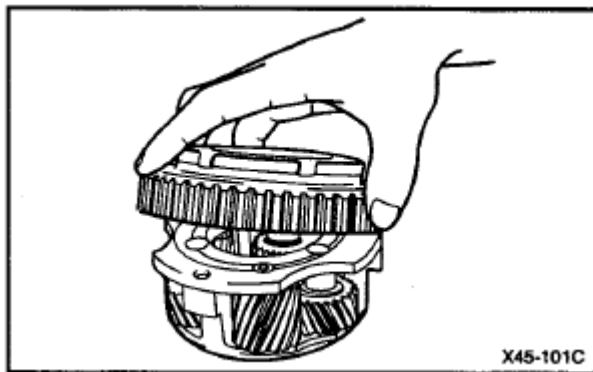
Removing Overrunning Clutch Outer Race Assembly
